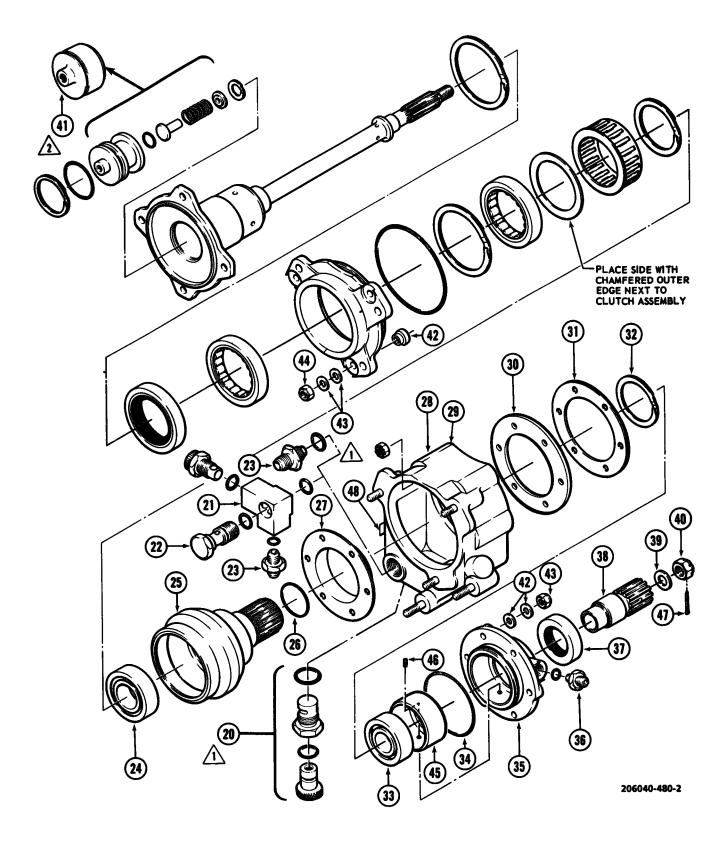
Freewheeling Assembly – Exploded View (Sheet 2)
